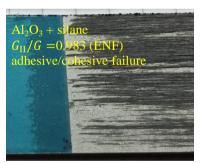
Fracture surfaces of Al₂O₃ blasted + silane treated specimens (representative examples).
